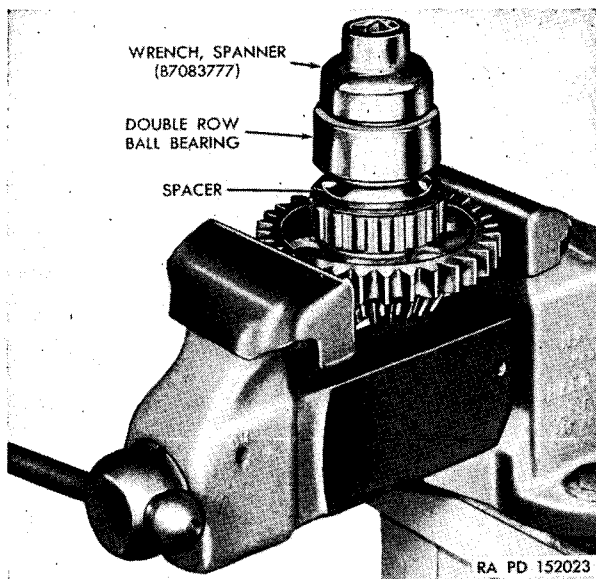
Spanner wrench (B7083777) installed on converter-output-bevel-pinion lock nut.
